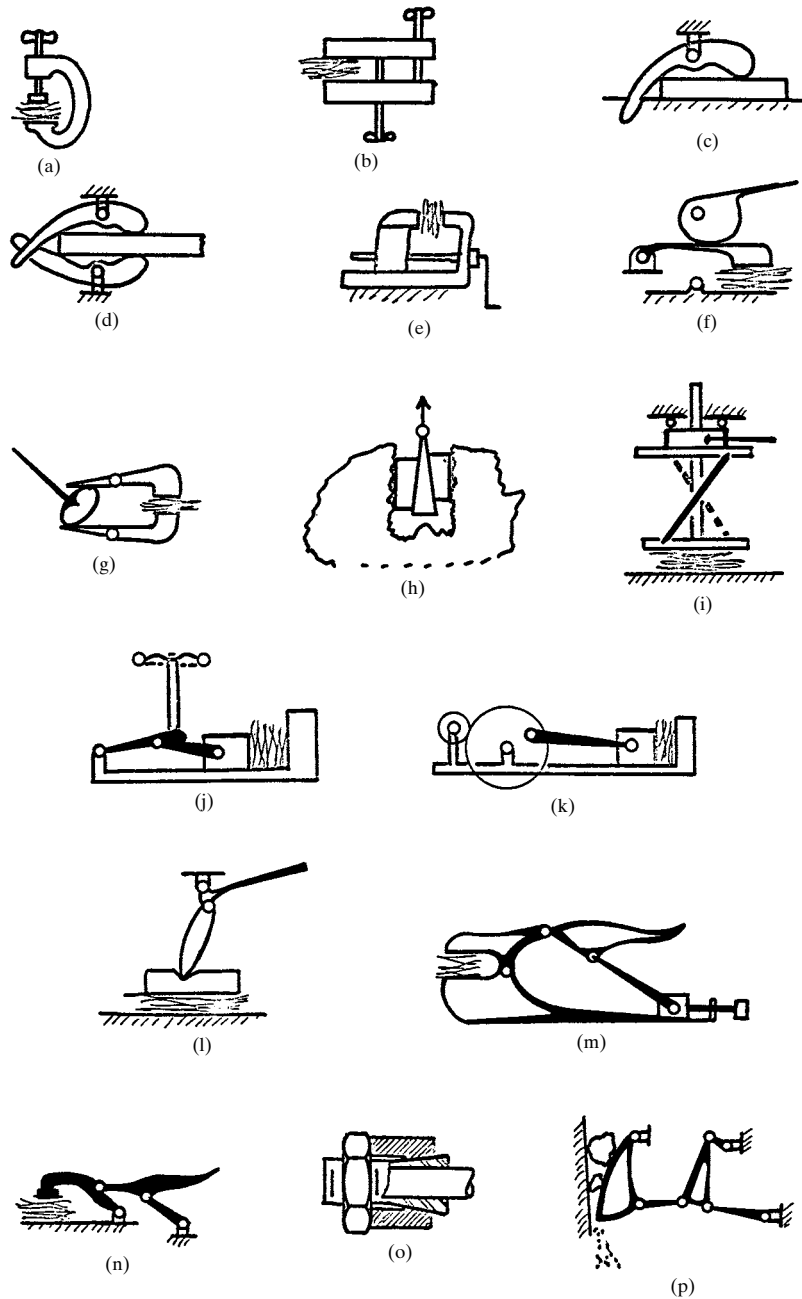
Clamping mechanisms. These devices are used to hold items for machining operations or to exert great forces for embossing or printing. (a) C clamp; (b) screw clamp; (c) cam clamp; (d) double cam clamp; (e) vise; (f) cam-operated clamp; (g) double cam-actuated clamp; (h) double wedge; (i) to (l) toggle press; (m) vise grips; (n) toggle clamp; (o) collet; (p) rock crusher.
